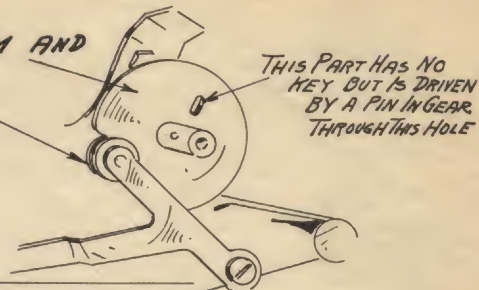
ASSEMBLE MAIN DRIVING GEAR.
